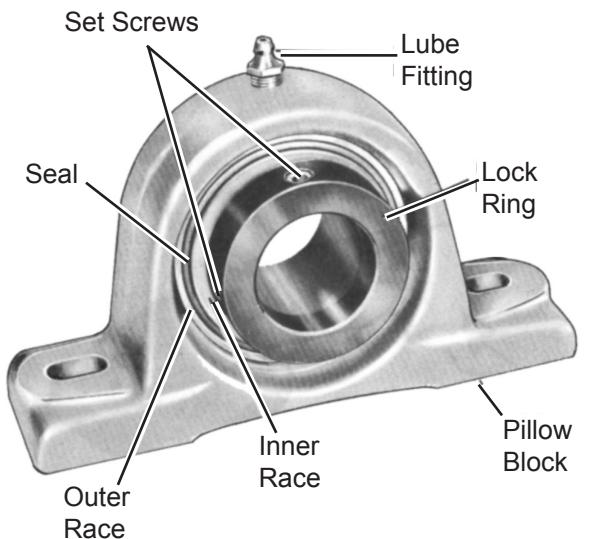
BEARING WITH SETSCREW TYPE LOCKING DEVICE
